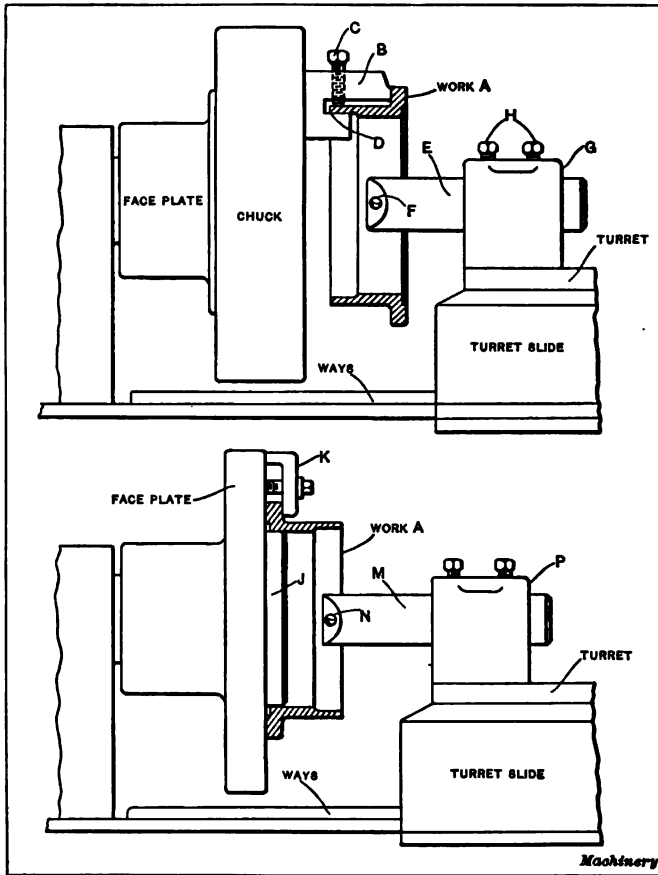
Thin Flanged Collar Machined on a Pratt & Whitney Turntable Lathe
